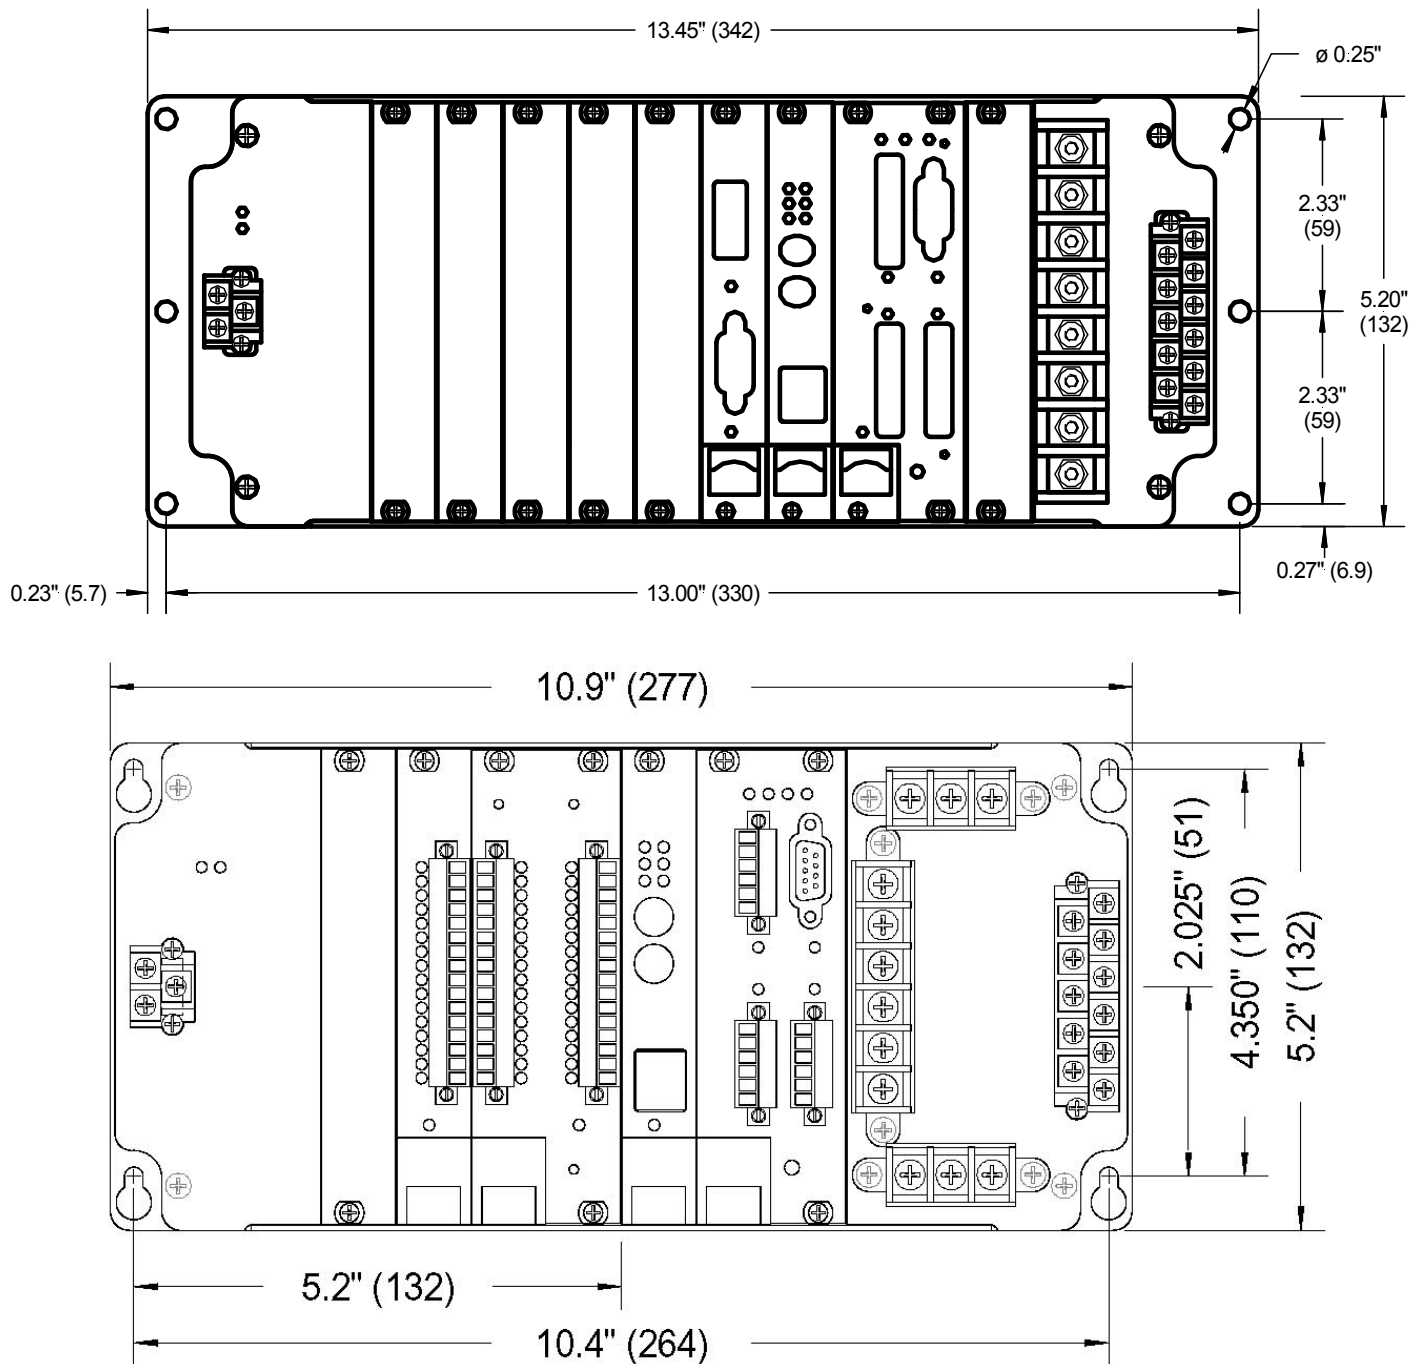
Mounting and Overall Dimensions (C12A8 and C10A7)
